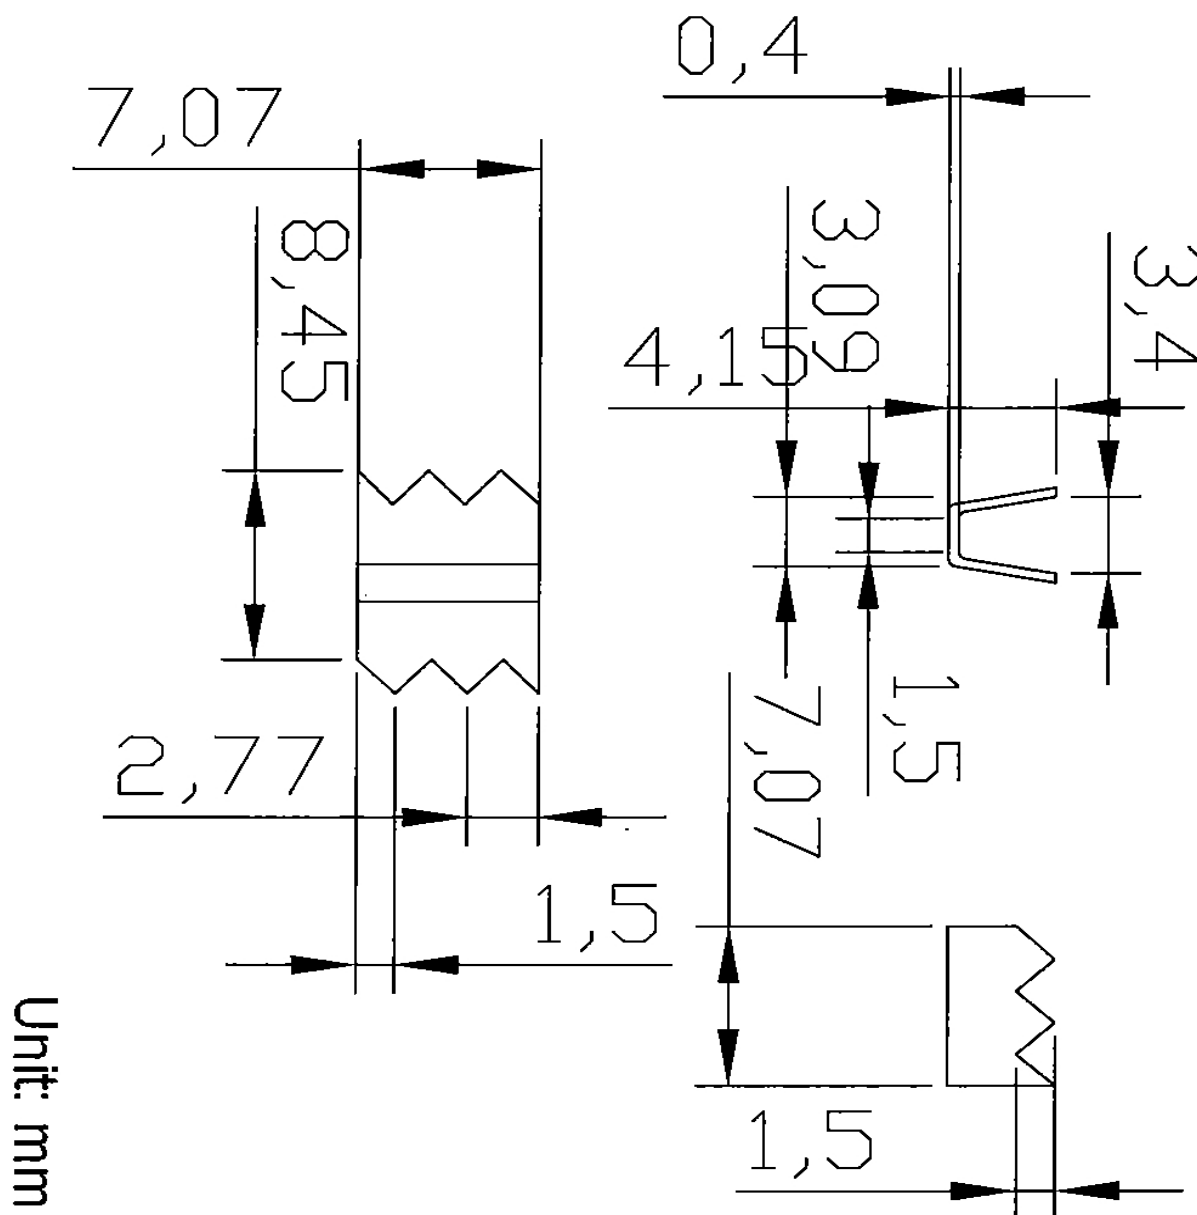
Engineering dimension drawing for overall enclosure dimension for 130101
